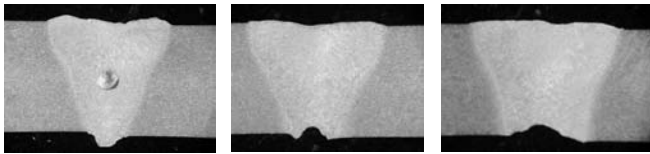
BEAD CROSS-SECTION WITH 10 MM STEP ALONG THE WELDING DIRECTION
